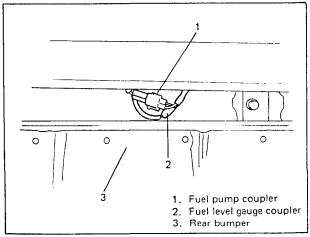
C-11 Fuel Pump and Level Gauge Couplers
